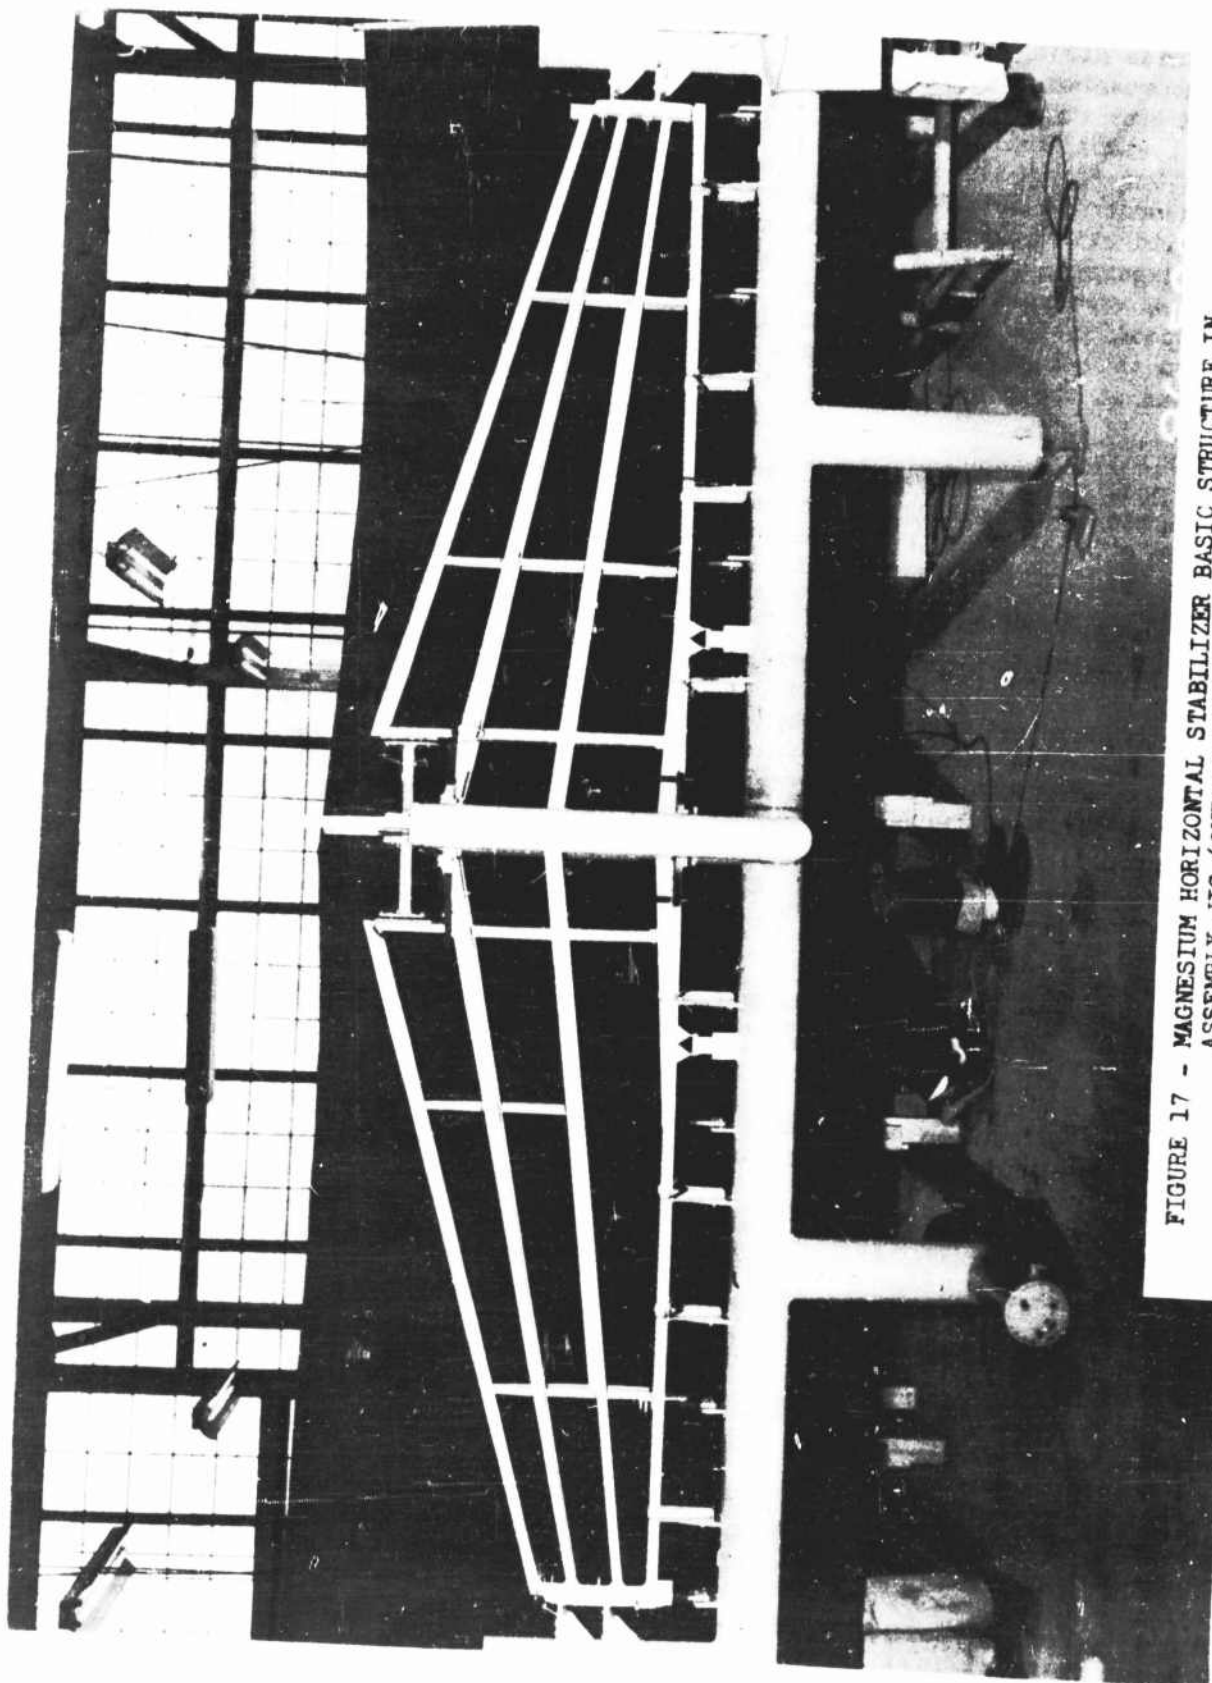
MAGNESIUM HORIZONTAL STABILIZER BASIC STRUCTURE IN ASSEMBLY JIG (ONE SEGMENT OF RIB ON LEFT SIDE OMITTED IN PHOTO)
